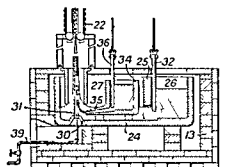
MAKING STRIPED THERMOMETER TUBING BY W J WOOD'S PROCESS
